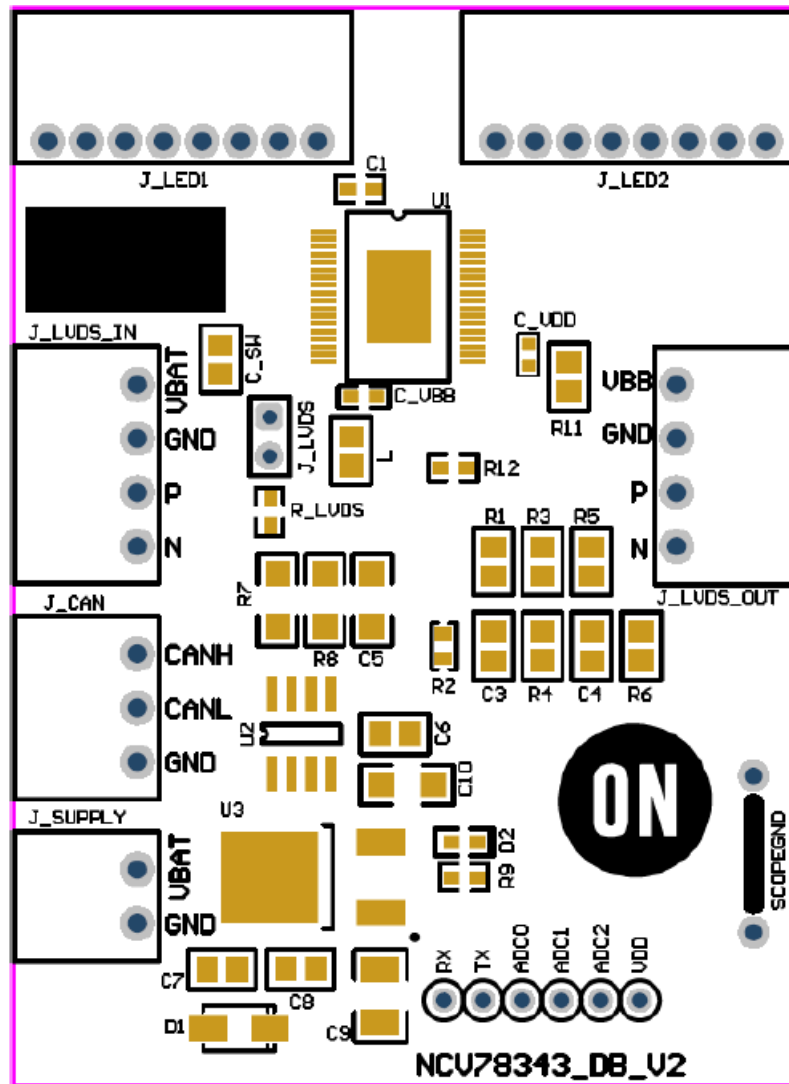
NCV78343R1DAGEVB Satellite Board Assembly Drawing
